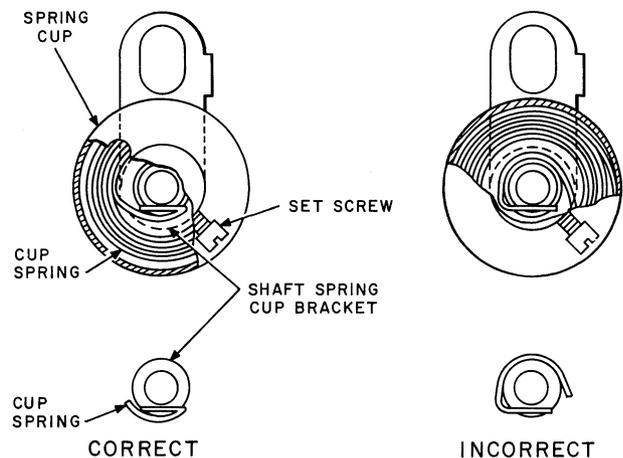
Correct and Incorrect Methods of Attaching Cup Spring to the Shaft Spring Cup Bracket
